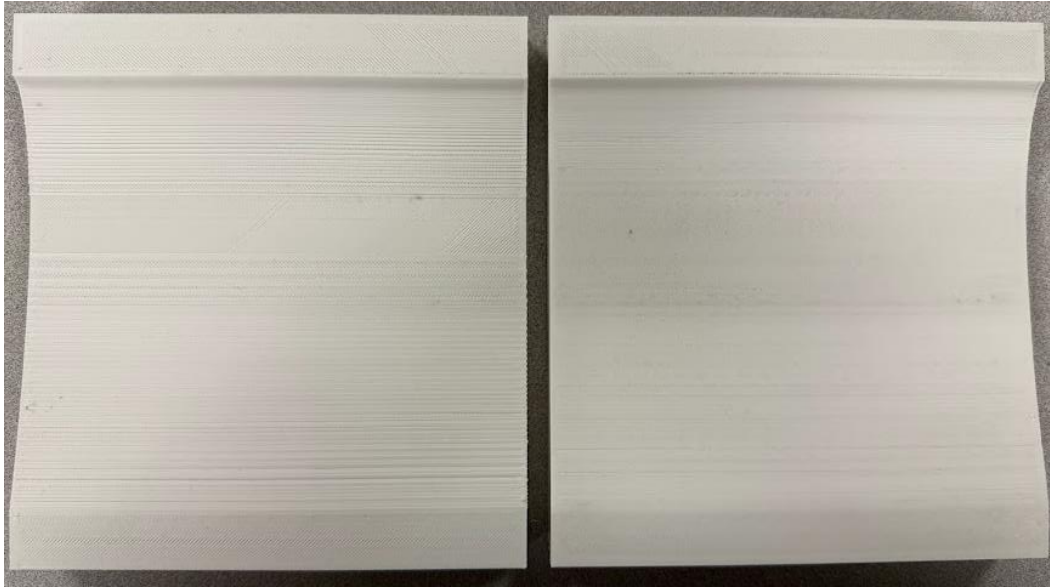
(Left) Unsanded Mold (Right) Completely Sanded Mold
